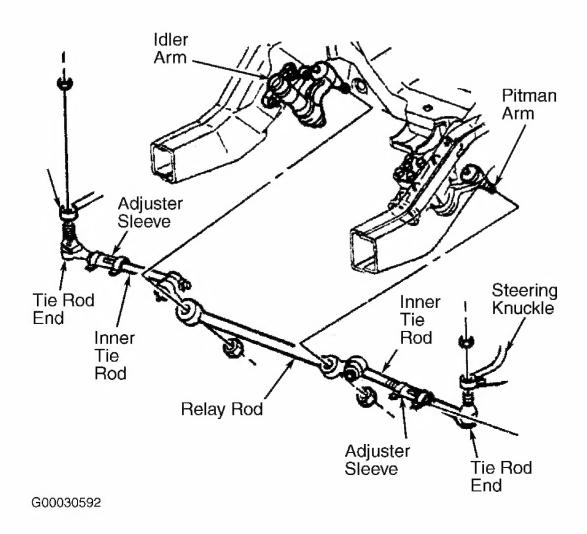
Exploded View Of Steering Linkage ("C/K" Series - Old Style) Courtesy of GENERAL MOTORS CORP.
